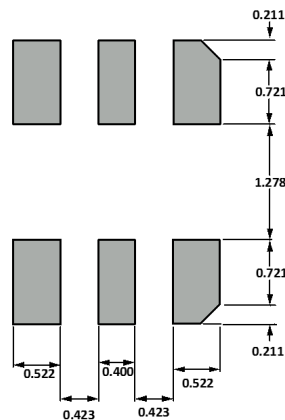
Suggested Solder Paste Stencil Pattern Layout
